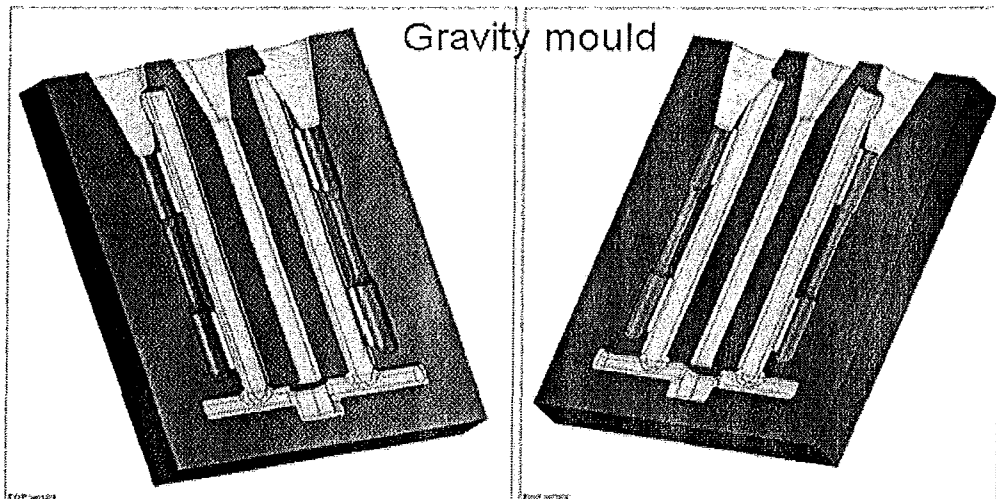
Two halves of the mould used for conventional gravity casting.
